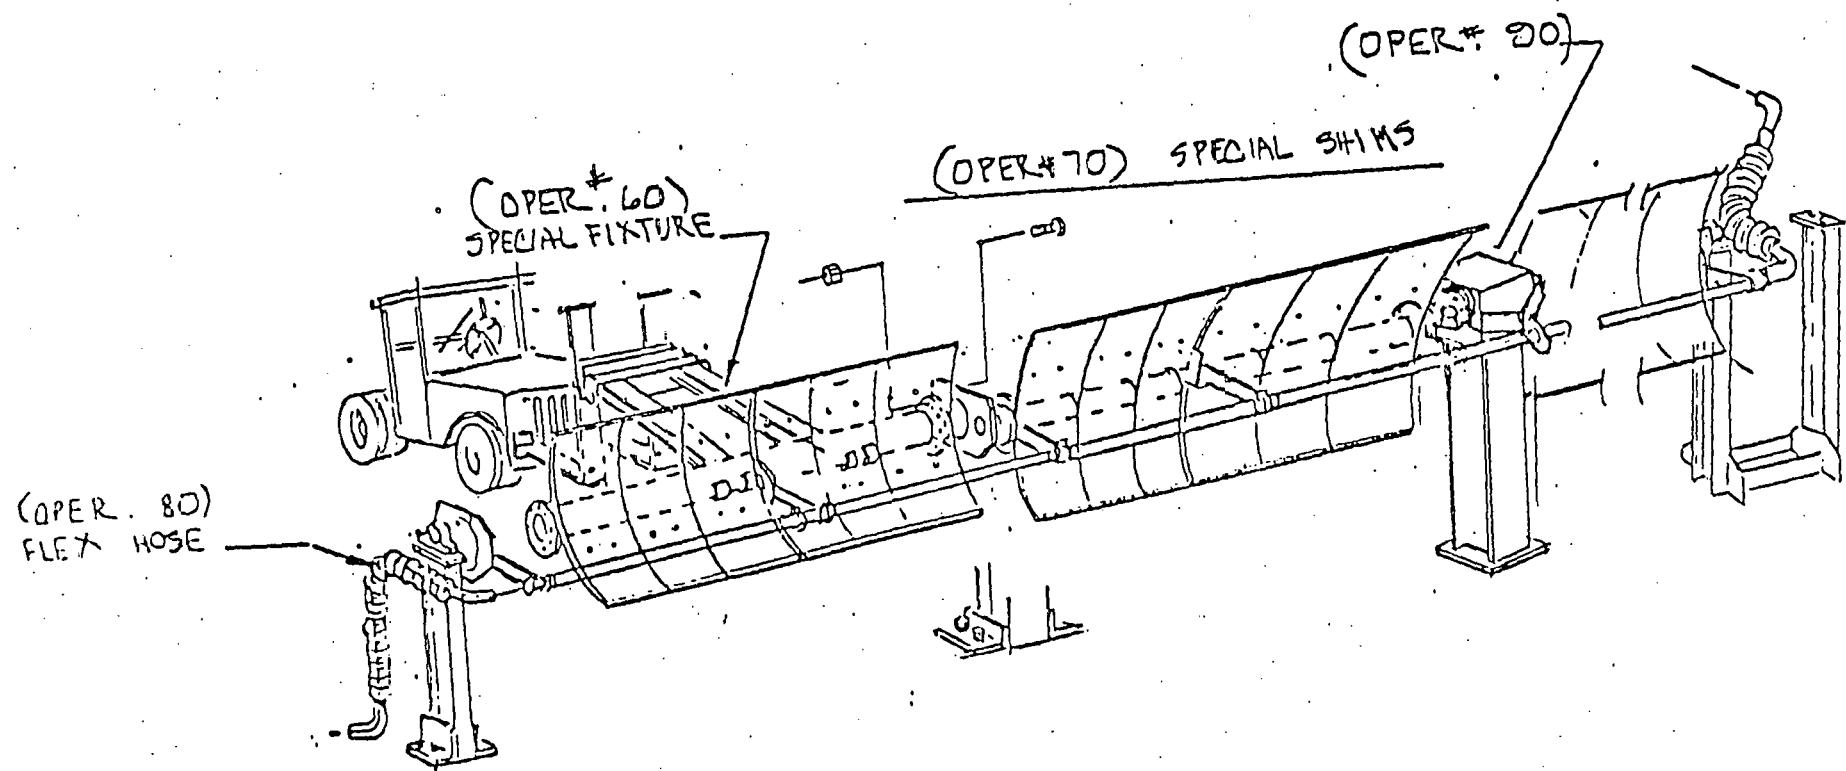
80 FT. COLLECTOR MODULE ASSEMBLY
